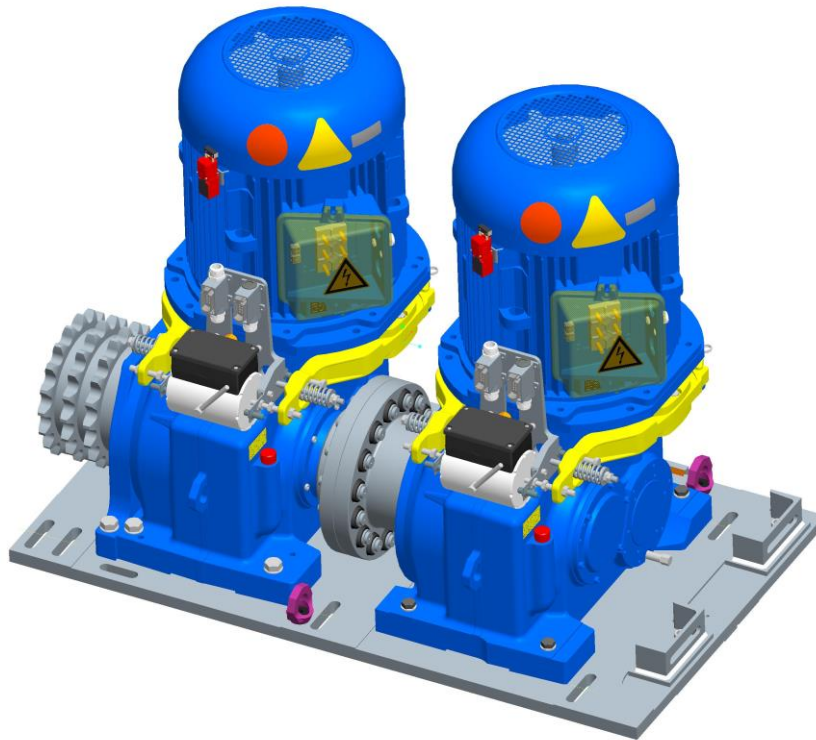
Dual machine, consisting of 2x Drive unit, 1xIntermediate coupling, 1xBasic plate and 1x Chain wheel
